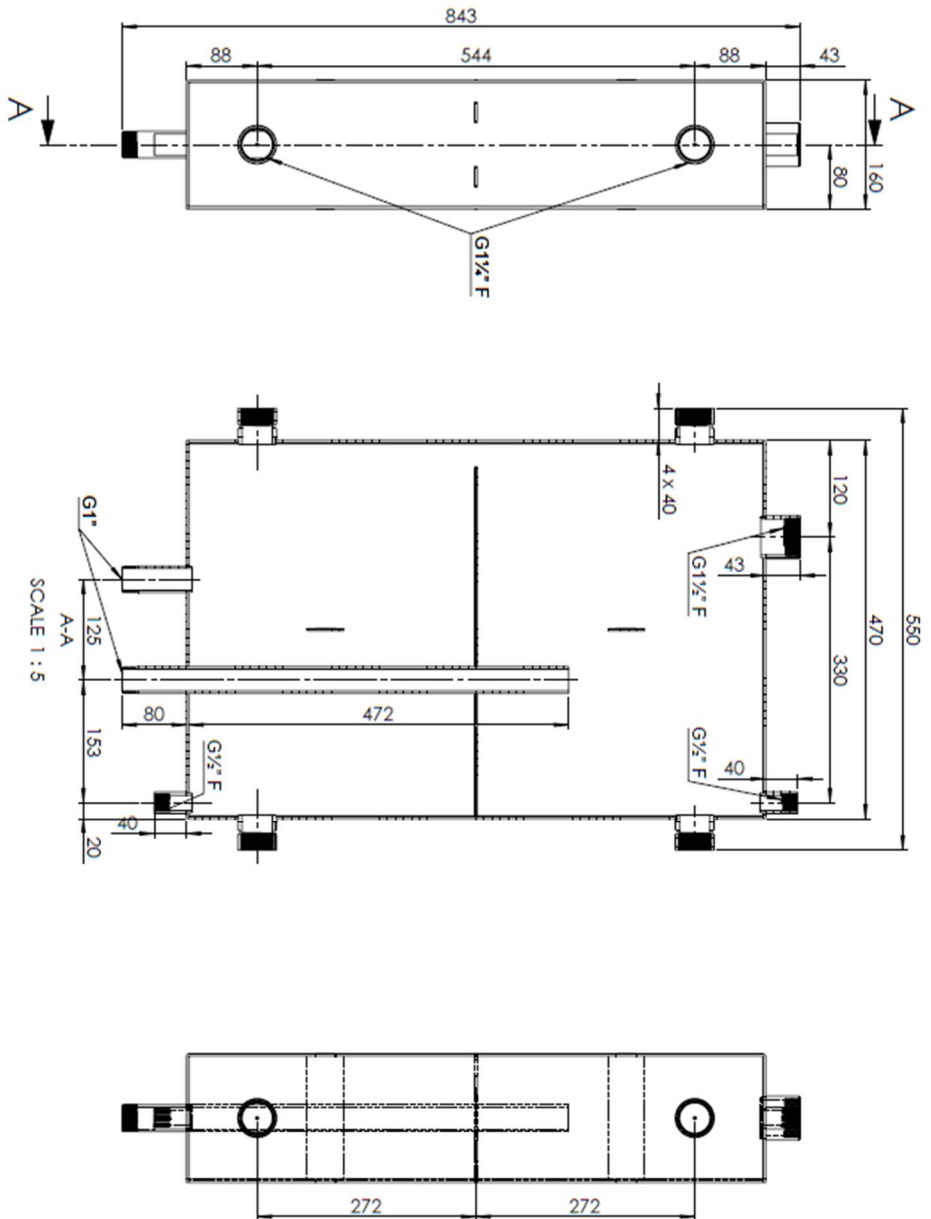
Dimensions of buffer tank ABT 50 without insulation.
